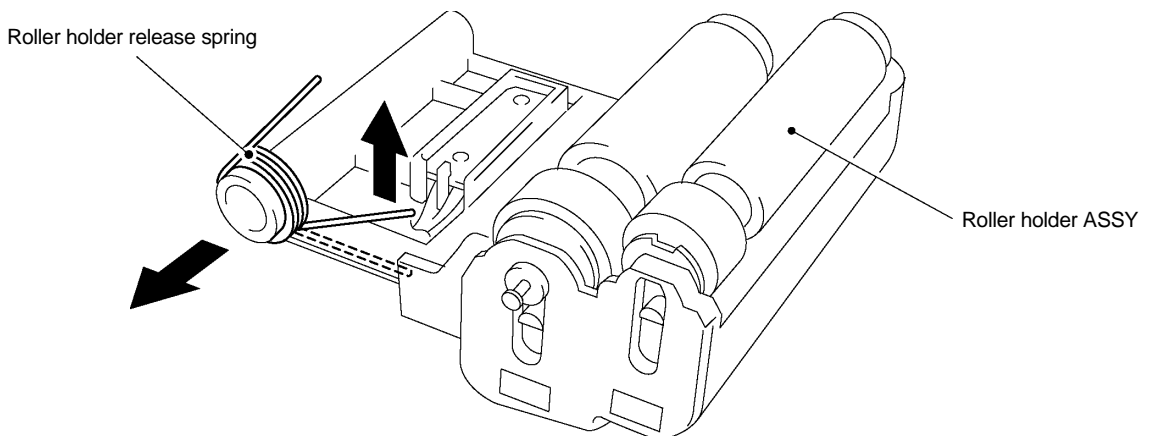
Disassembling the Head/Roller Holder Unit (2)
